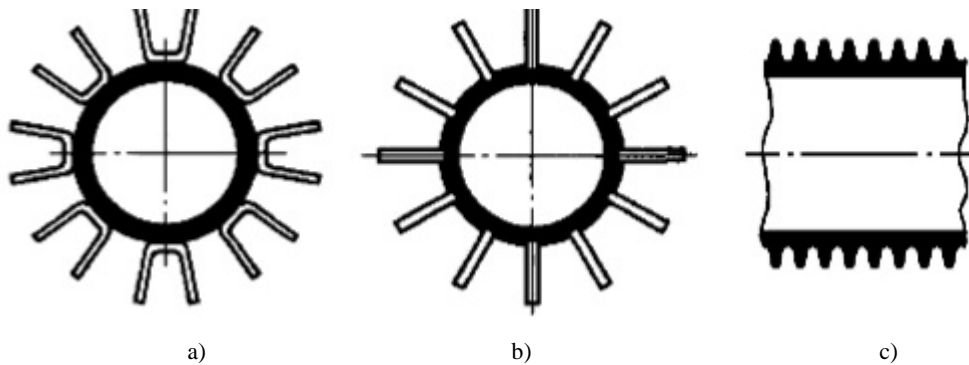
Ribbed pipes: a - barriers are welded; b - twisted; c - shaped channels are opened
